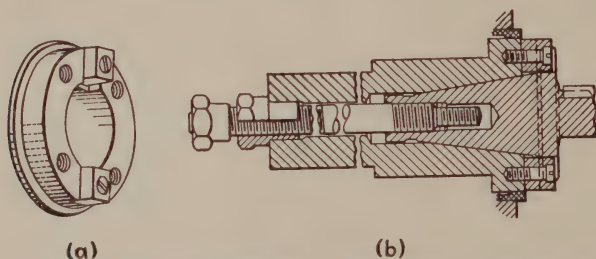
Standardized spindle end. The method of holding arbors and adapters is shown in (b). The larger thread on the end of the draw-in bolt is used in most cases, but certain adapters, collets, etc. require the smaller thread.
